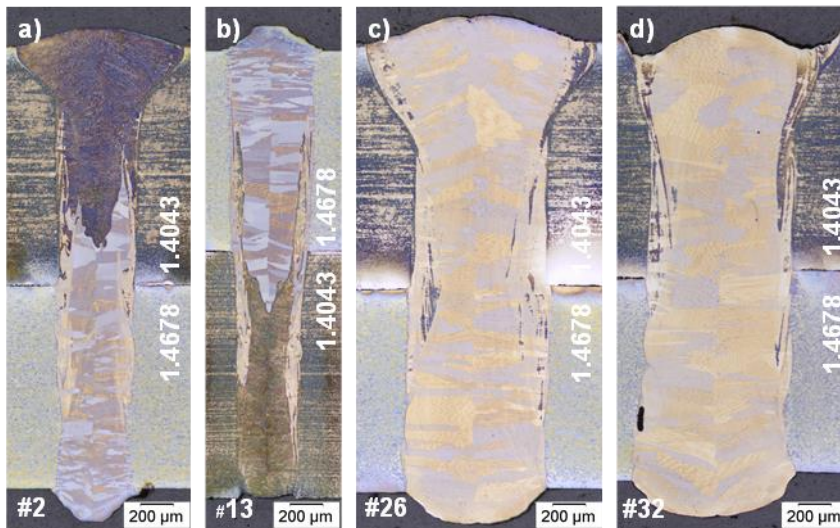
Macro-sections of dissimilar welds in the combination 1.4678 and 1.4034: Left $f = 280$ mm at 4 (a) and 10 m/min (b) welding speed, right $f = 600$ mm at 7 (c) and 10 m/min (d)
